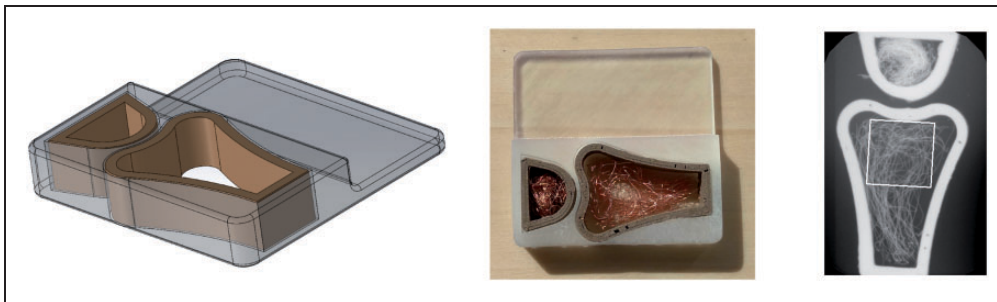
Type-D chips. Left: CAD drawing. Center: 3D printed chip and copper wiring. Right: radiogram.
